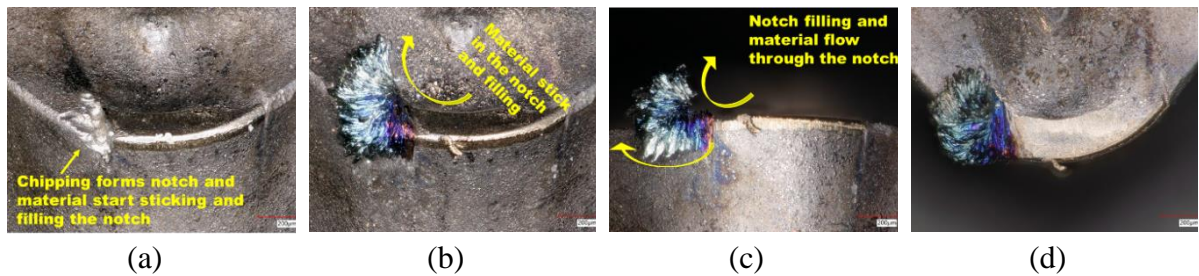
Sticking and filling mechanism of workpiece material in the DOC notch groove formed by chipping (a) notch groove where the workpiece material sticking, (b) sticking, filling, and sliding of workpiece material in the notch, (c) side view of the notch filling and sliding mechanism, (d) top view of the notch and insert
